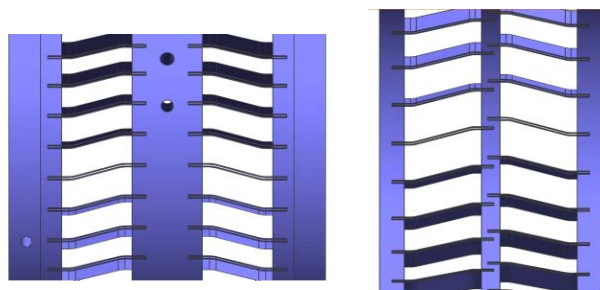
Detail showing the drastic reduction in the thickness of the rings from the original design (left) to the “light” version (right) and the simplification in the electron beam welding pattern for the assembly of the flexural elements. For numerical values refer to Table 1.
